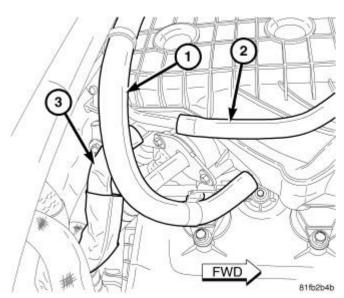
EGR Tube, PCV & Power Brake Booster Vacuum Hoses Courtesy of CHRYSLER LLC
